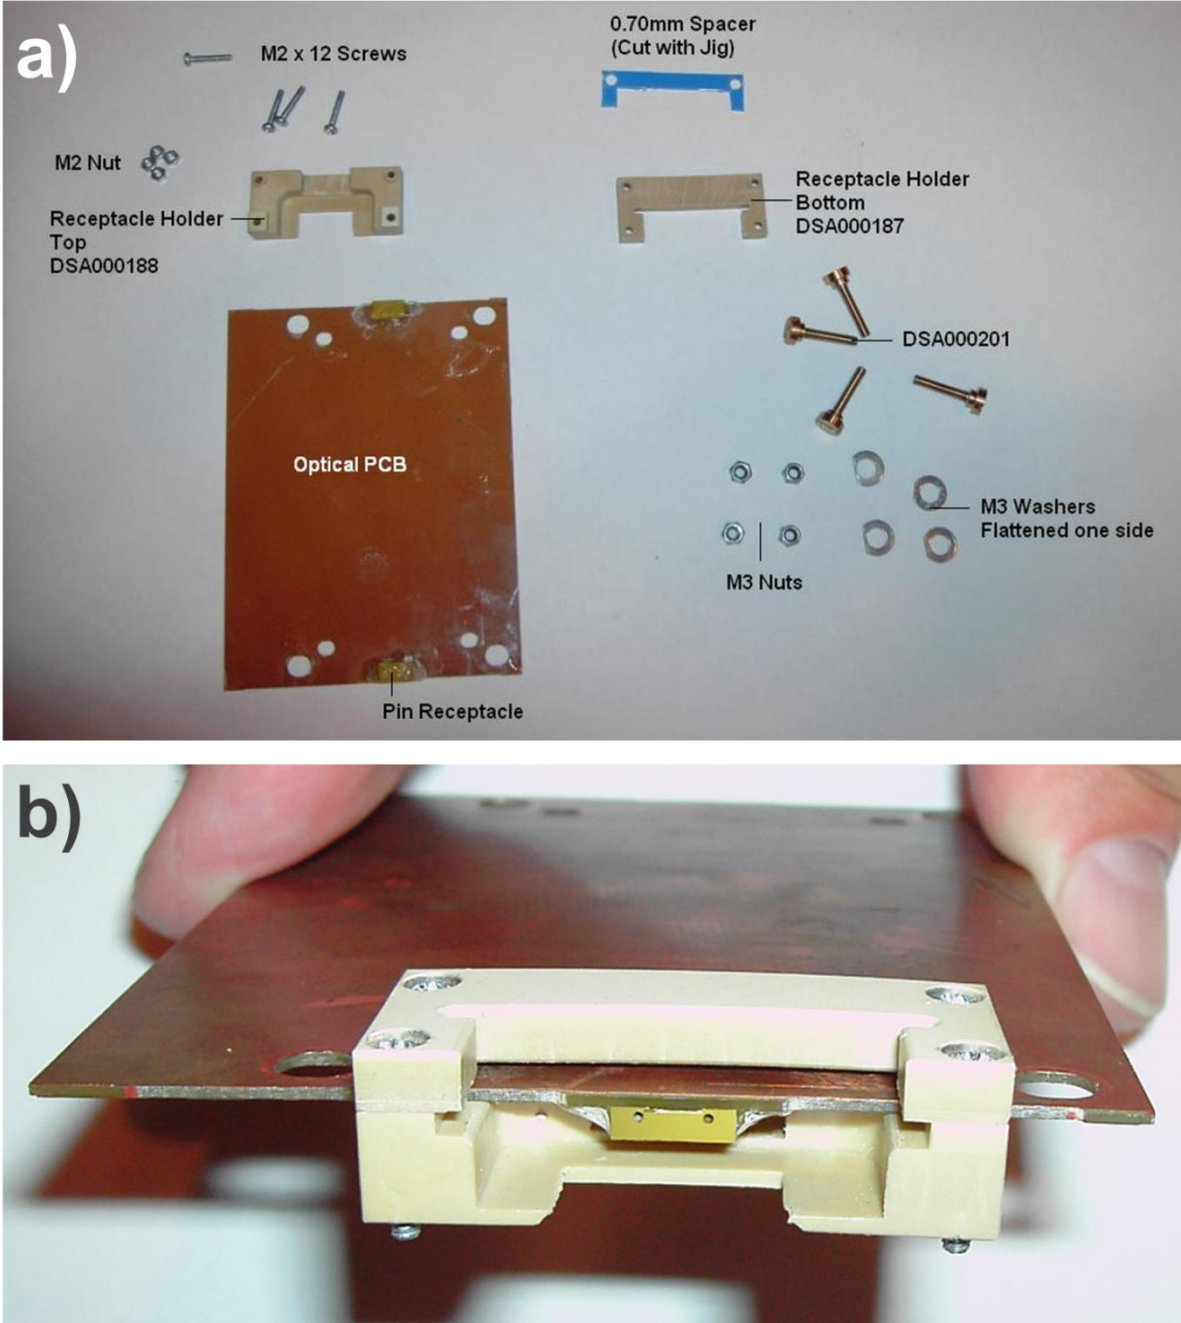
optical backplane assembly: a) Exploded view of optical backplane assembly and parts including the receptacle holder, b) optical waveguide interface
